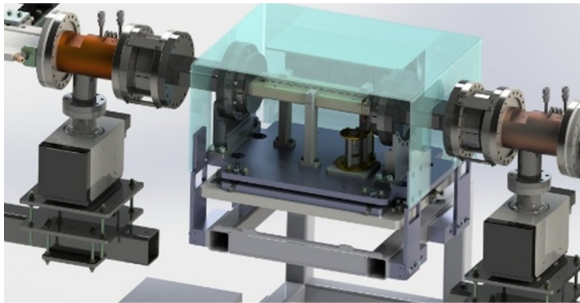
Mechanical assembly of the prototype test at ESRF-EBS.
